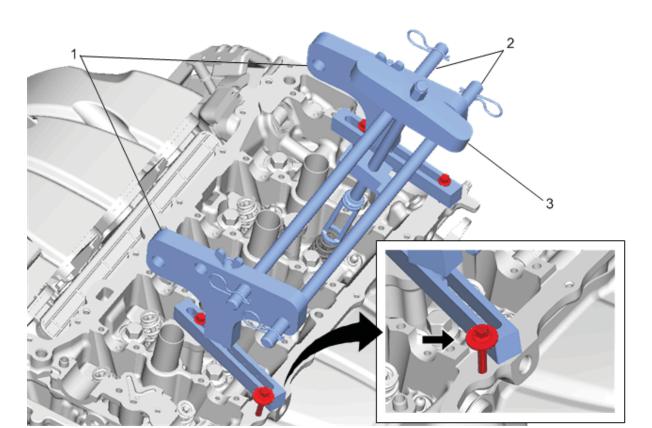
EN-50717 Valve Spring Compressor Courtesy of GENERAL MOTORS COMPANY
